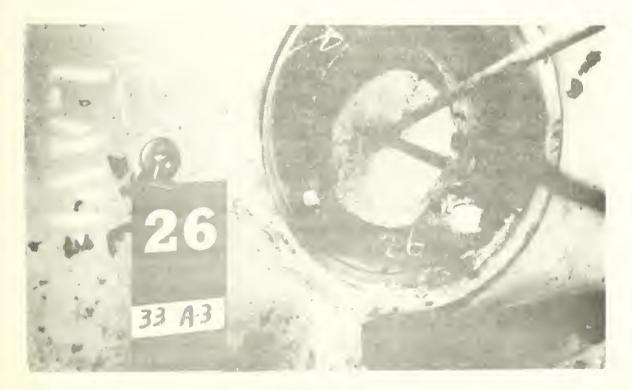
Impact rwenty-Six, Target 33, Penetration of Transmission Case (Brake diust Access Door Removed).
